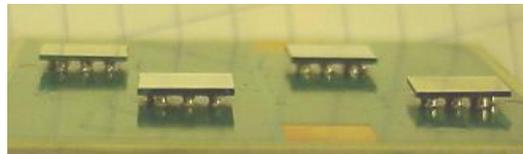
The power devices and flex substrate assembly after flip-chip bonding.
